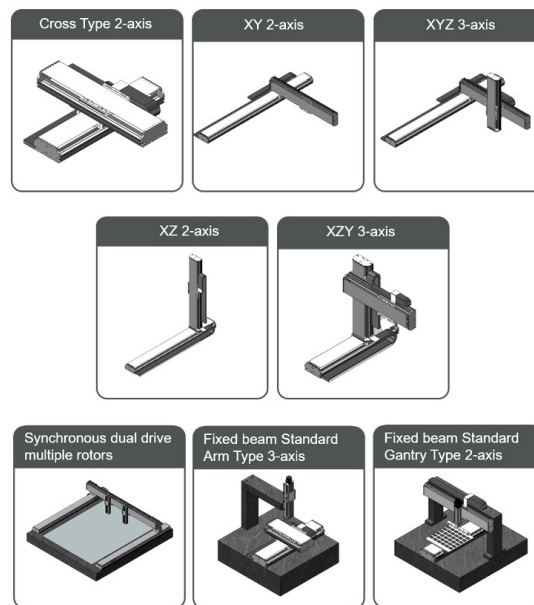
Linear motor modules combinations, reproduced from www.kasite-linear-module.com
